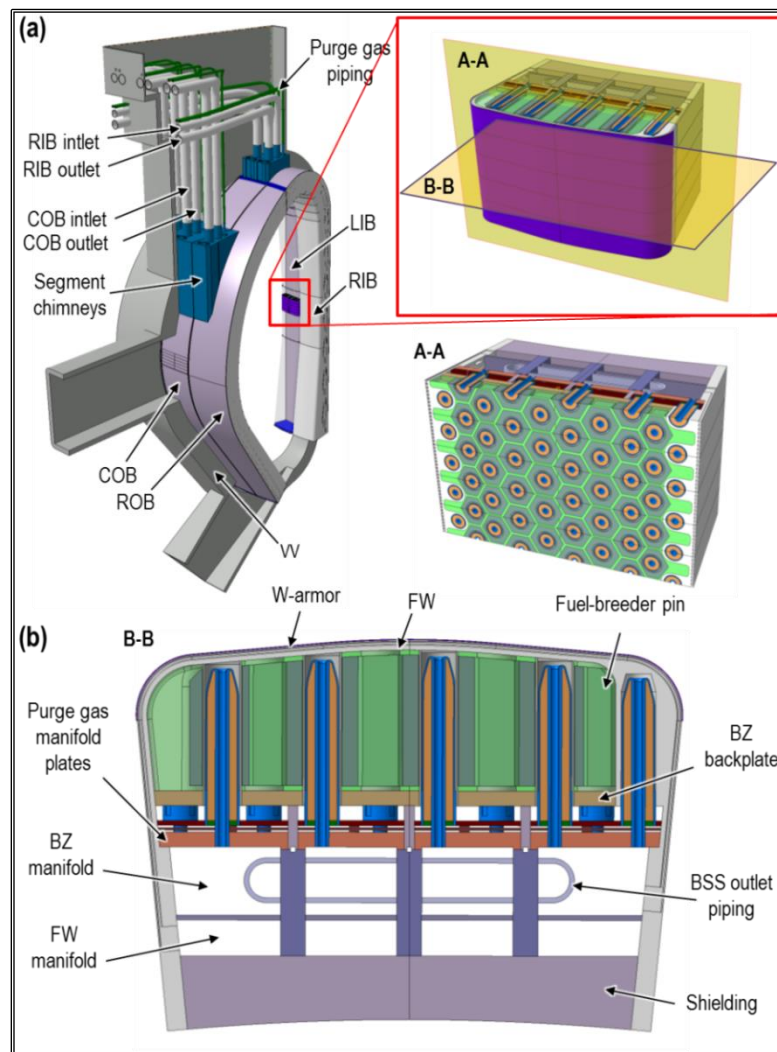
HCPB design with fuel-breeder pin hexagonal assembly [31]
